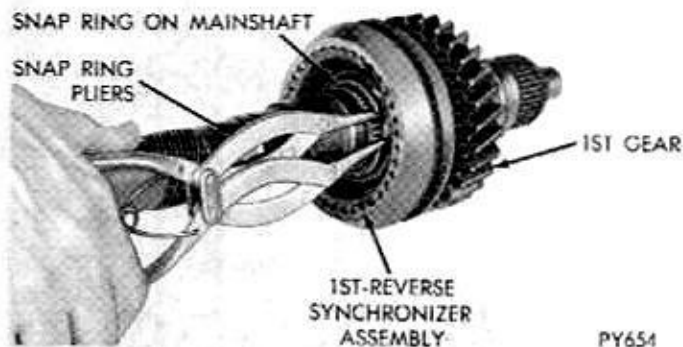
Snap Ring—1st-Reverse Synchronizer Clutch Gear—Removal or Installation
